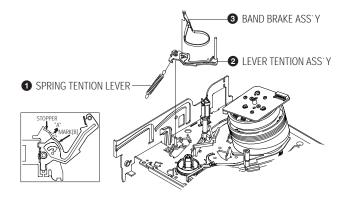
Lever Tension Ass'y, Band Brake Ass'y Removal
